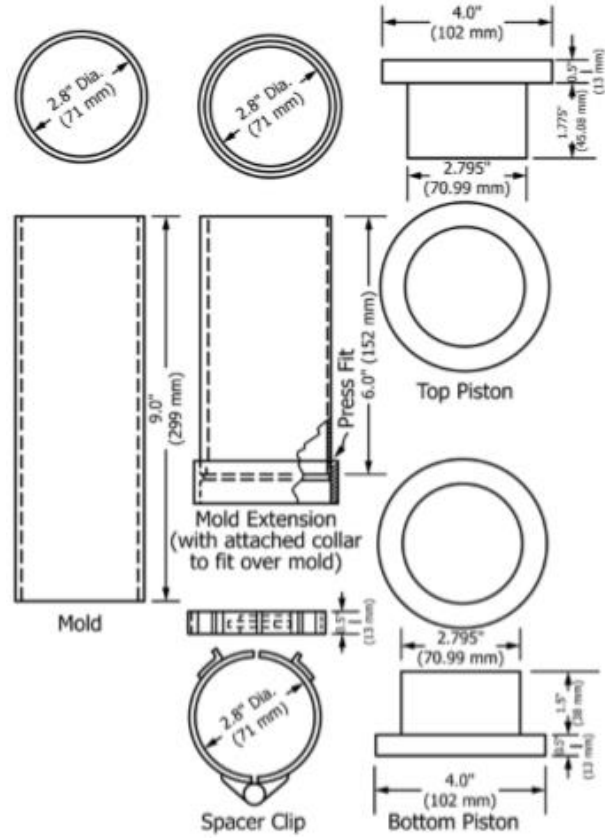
Steel-Mold equipment dimensions (ASTM D1632 2017)
